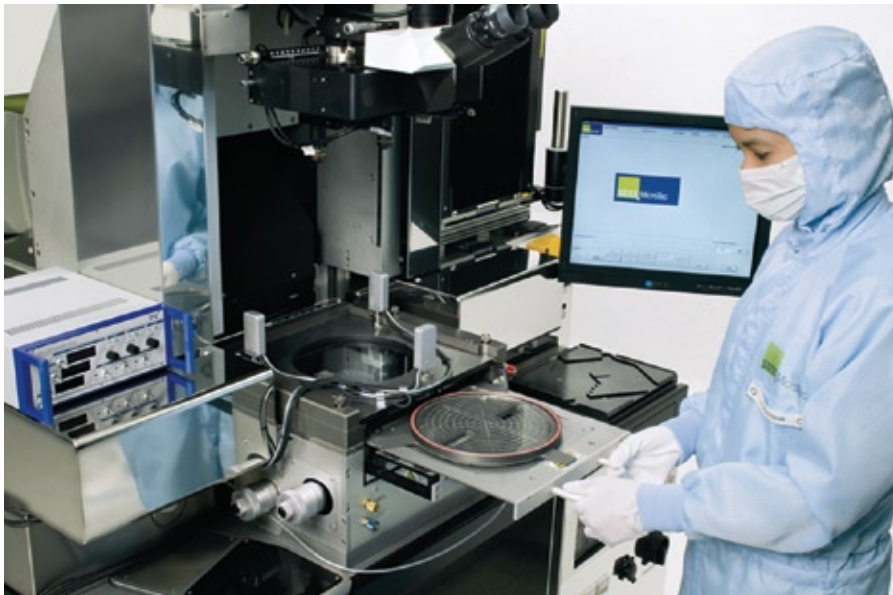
Mask Aligner MA/BA8 Gen3 dedicated for Wafer-Level Camera (WLC) manufacturing and packaging. (www.suss.com)
